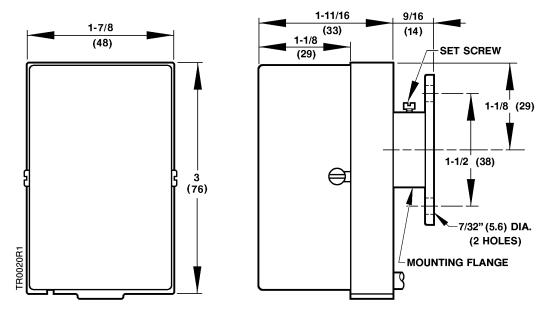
Dimensions of the Rigid Bulb and Remote Bulb Transmitters. (Bulb Not Shown. See Table 1).
